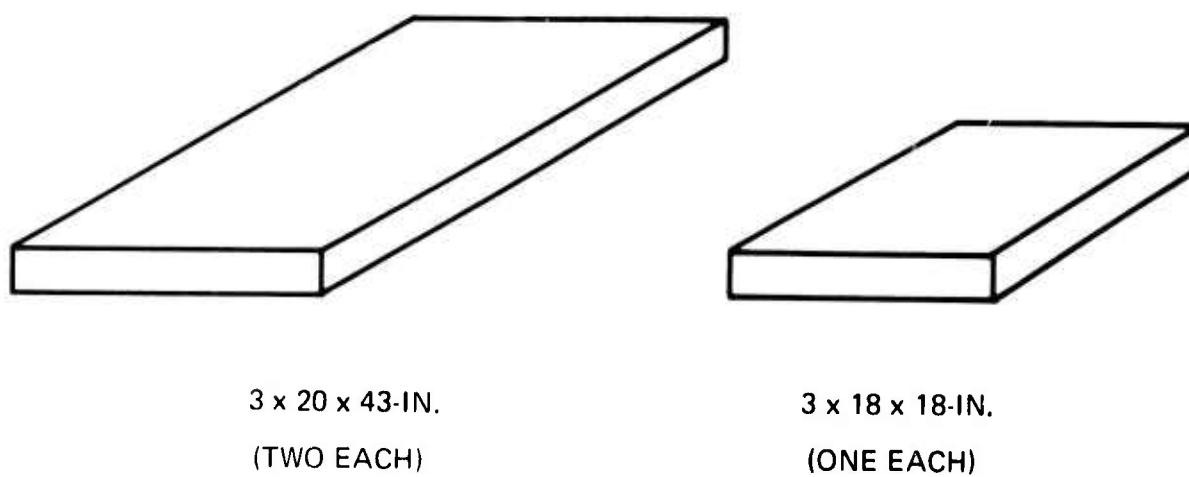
Shapes and Dimensions of Alloy 21 Plates
